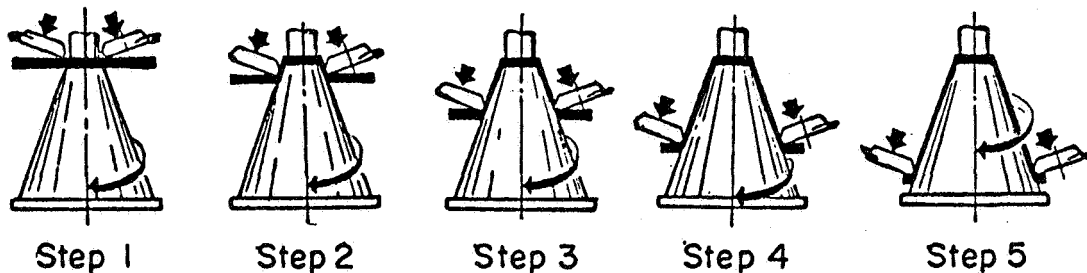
STEPS IN SHEAR FORMING A CONE (REF. 62)
